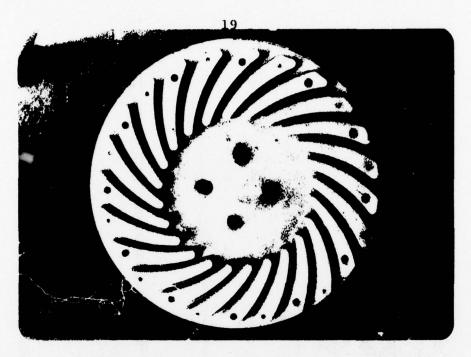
PLASTIC IMPELLER, TOP VIEW
